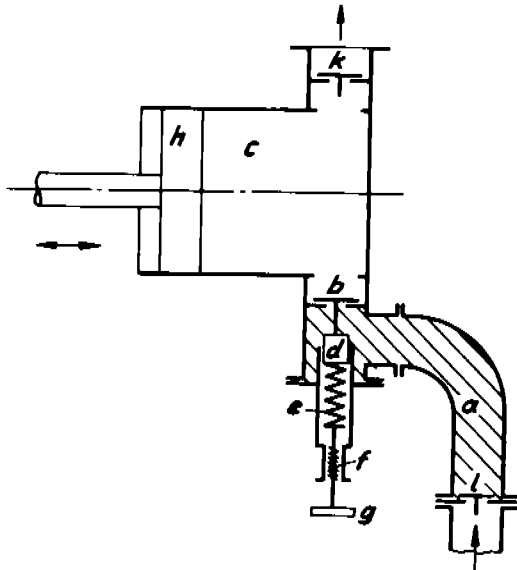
Additional clearance volume regulation with direct manual operation on the machine and clearance pocket being part of the suction duct. a = additional clearance volume, b = regulating valve, d = unloader piston, e = spring, f = spindle, g = handwheel, i = suction valve, k = discharge valve
